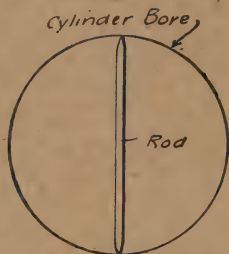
Rod Gauge for Testing Cylinder Bore
